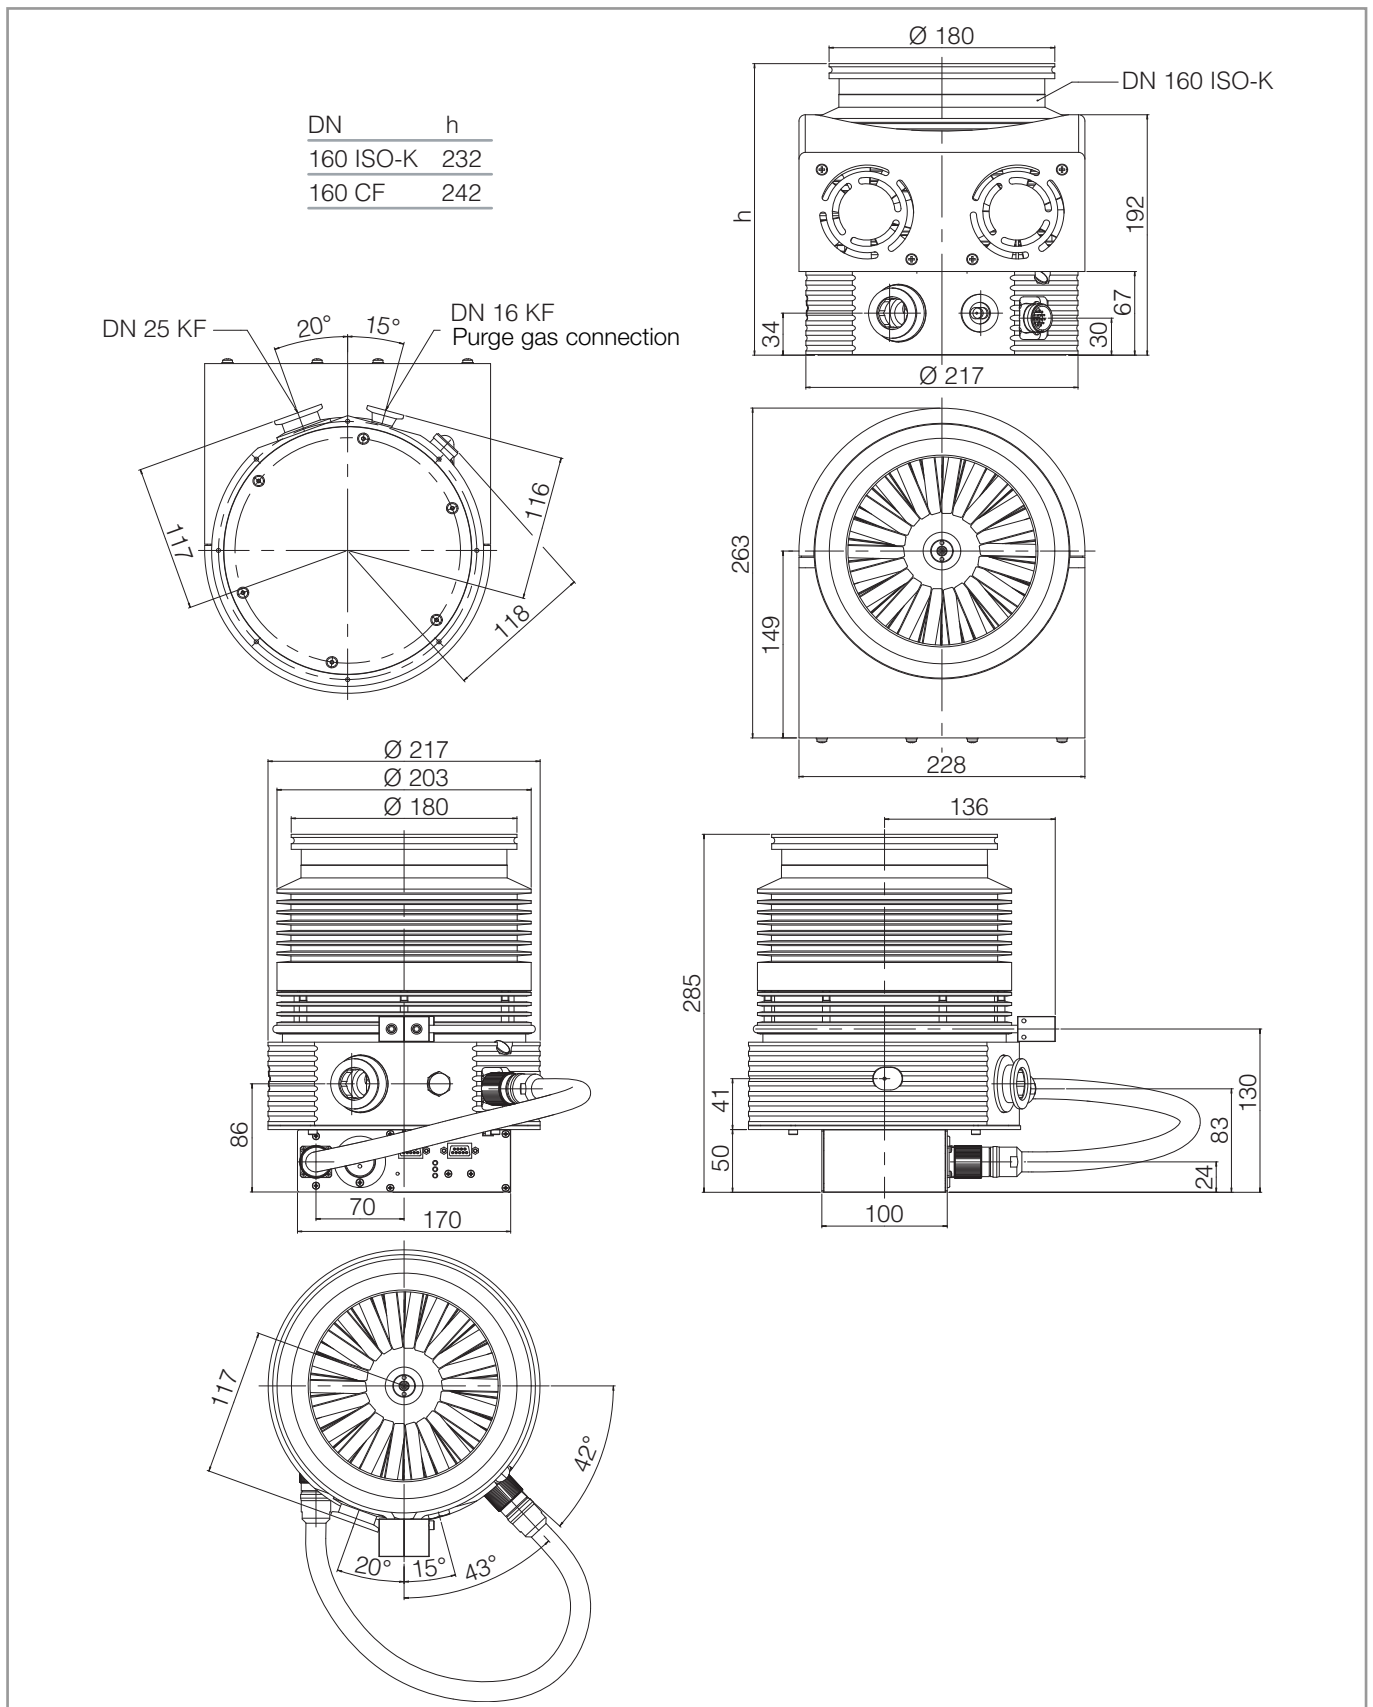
Dimensional drawings for SL 700 pumps (combination examples); dimensions in mm
